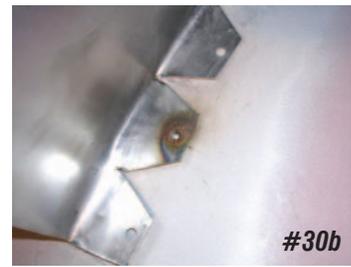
& 30b: The underside of the trunk floor along the cut lines was cleaned to bare metal and the tub was lowered into place one final time. When the fit was satisfactory the tub was tack welded to the trunk floor from underneath. The band was tack welded to the baffle from above. A few of the tabs were spot welded to the inside of the quarter panel. The line marking the edge of the wheelhouse seal is no longer visible in this photo. That surface was prepped and is now covered in a layer of weld-thru primer.
